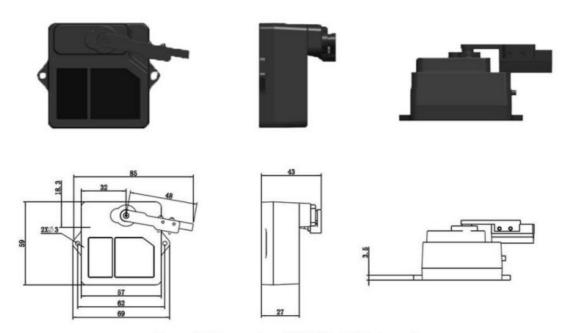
Dimension of TF02-Pro-W (Unit: mm)
